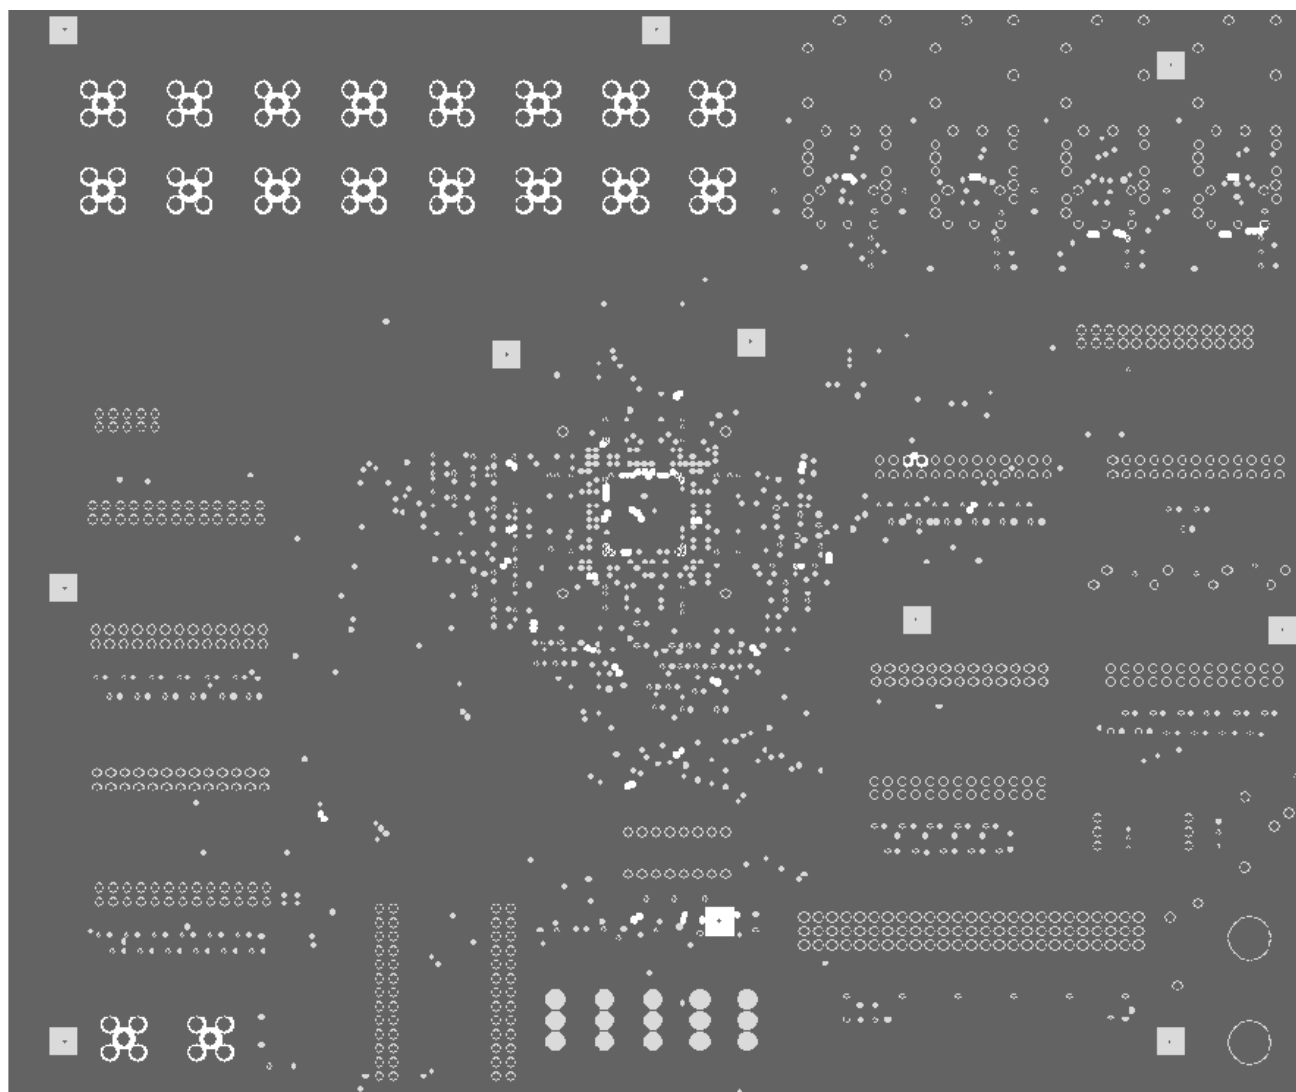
CYP15G0401DXB Eval Board Power Plane Layout
